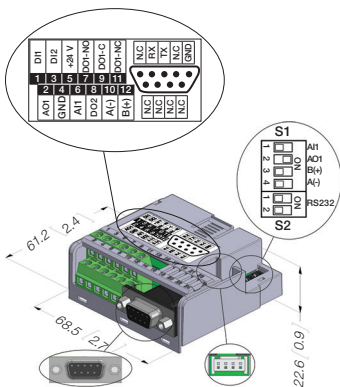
CFW500-CRS232 dimensions in mm [in], DIP-switches location and CFW500-MMF connector
